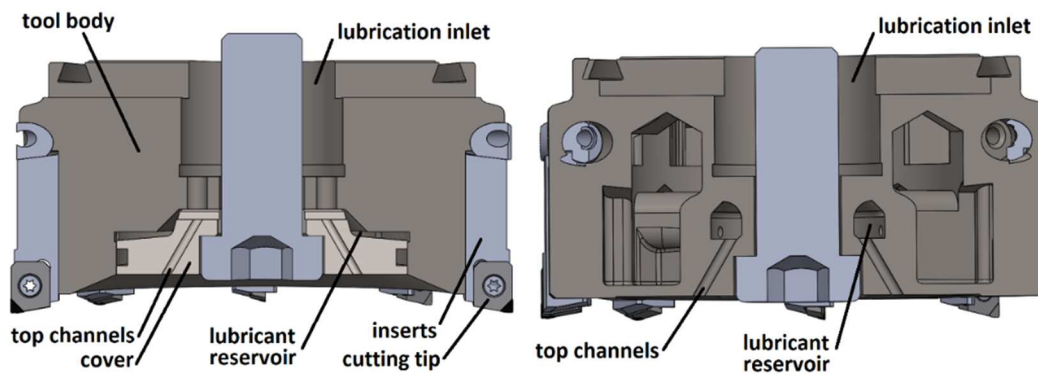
Original (left) and AM modified (right) versions of the cutting head tool.
